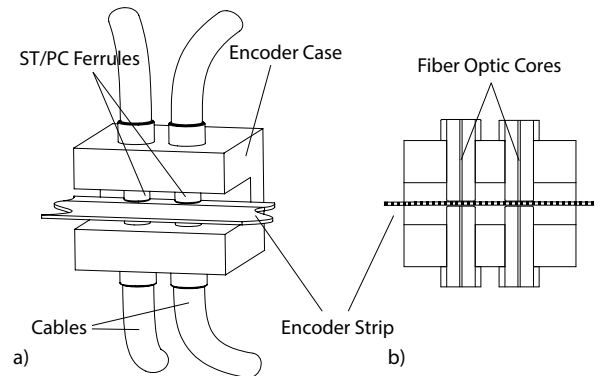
a) Encoder assembly b) Cross-section of the encoder
